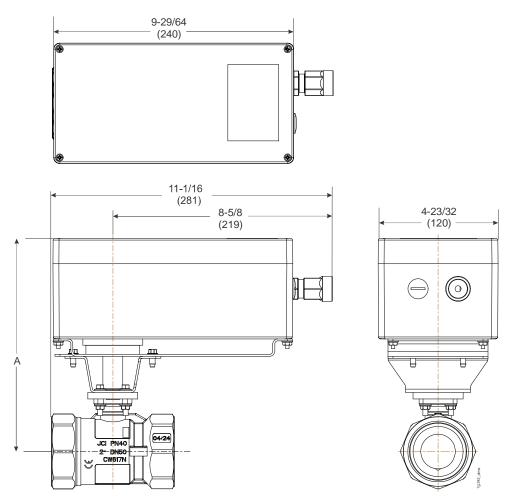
M9000-342 Valve Actuator Weather Shield Kit Dimensions, in. (mm) (See Table 6.)
